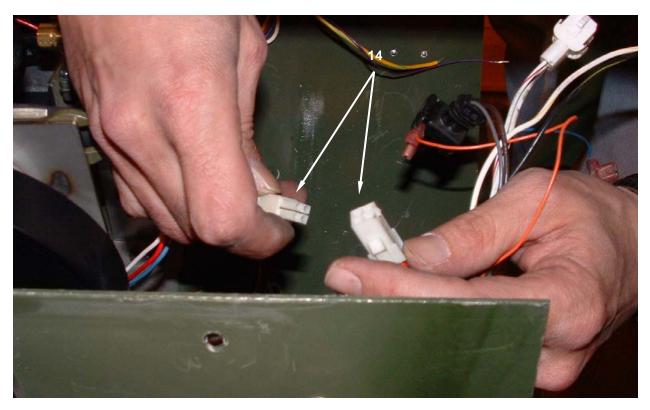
Replace the Electronic Box Assembly, Complete With Wire Harness – Reconnect Remaining Wiring.
